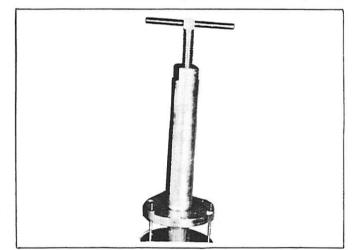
Pressing Roller Bearing from Carrier Ass'y
